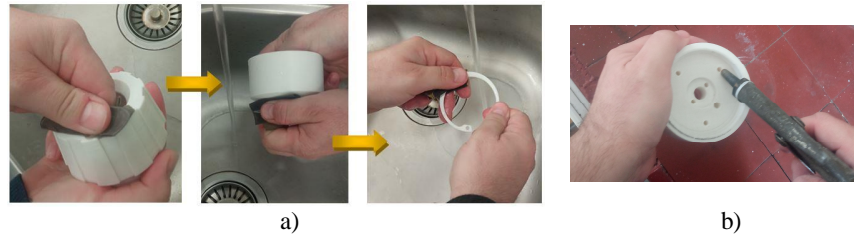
Supplementary material removal: a) using sandpapers, b) using compressor
